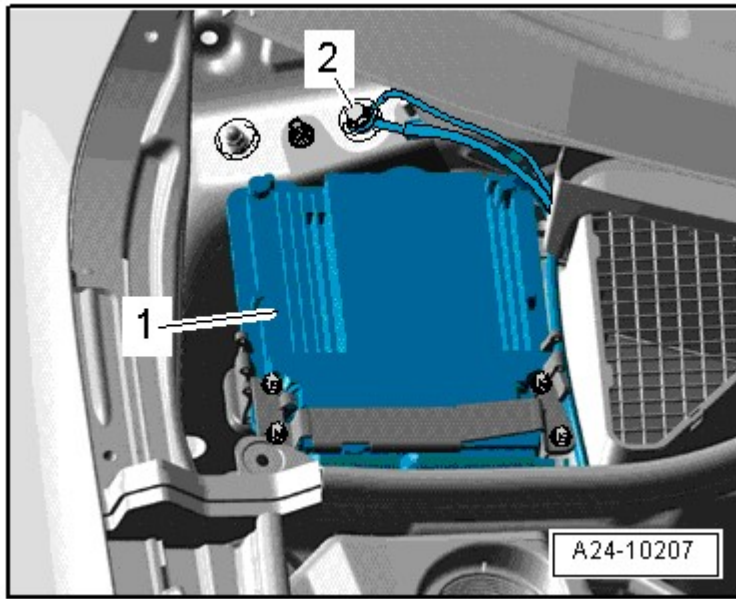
Locating Engine Control Module (ECM) -J623- -1-
